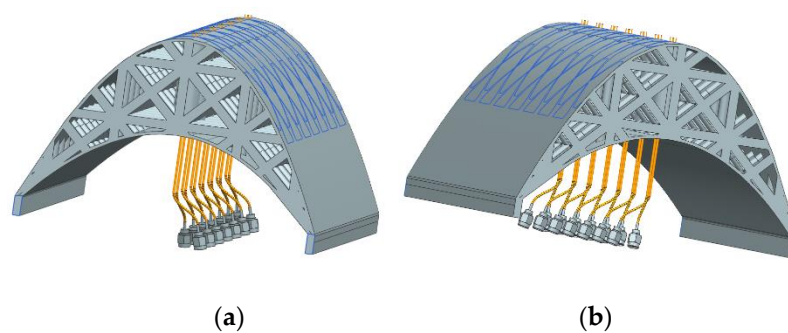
Cable assembly inserted into the antenna array structure through its side guide structure, (a) main View, and (b) solder pins aligned with the antenna array opening, 7 ports symmetrically distributed in order.
